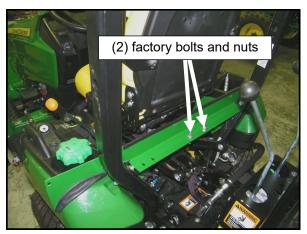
(Lower Rear Panel- Left Side of Vehicle)
